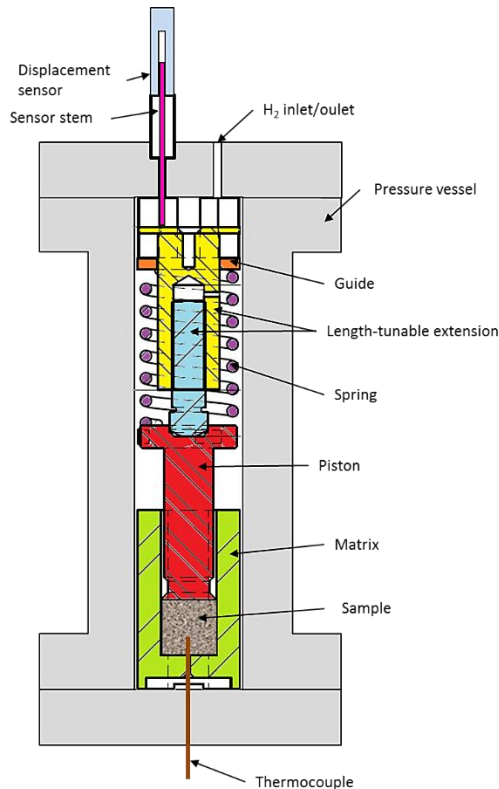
Scheme of the assembly with the inner parts designed for the COMEDHY test cell
